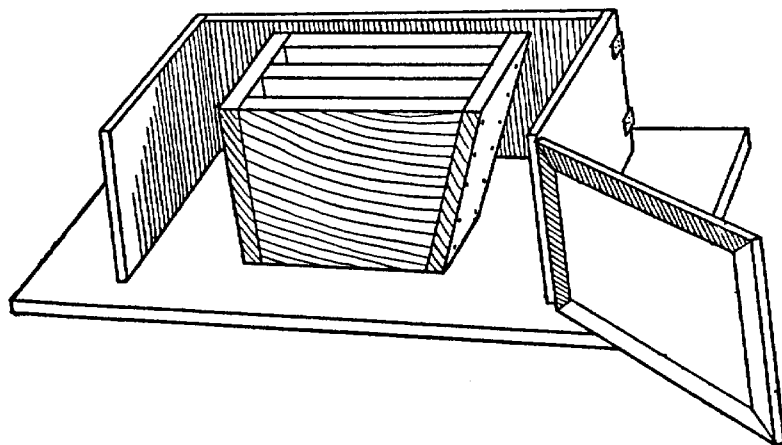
CEMENT BLOCK MACHINE OPEN
